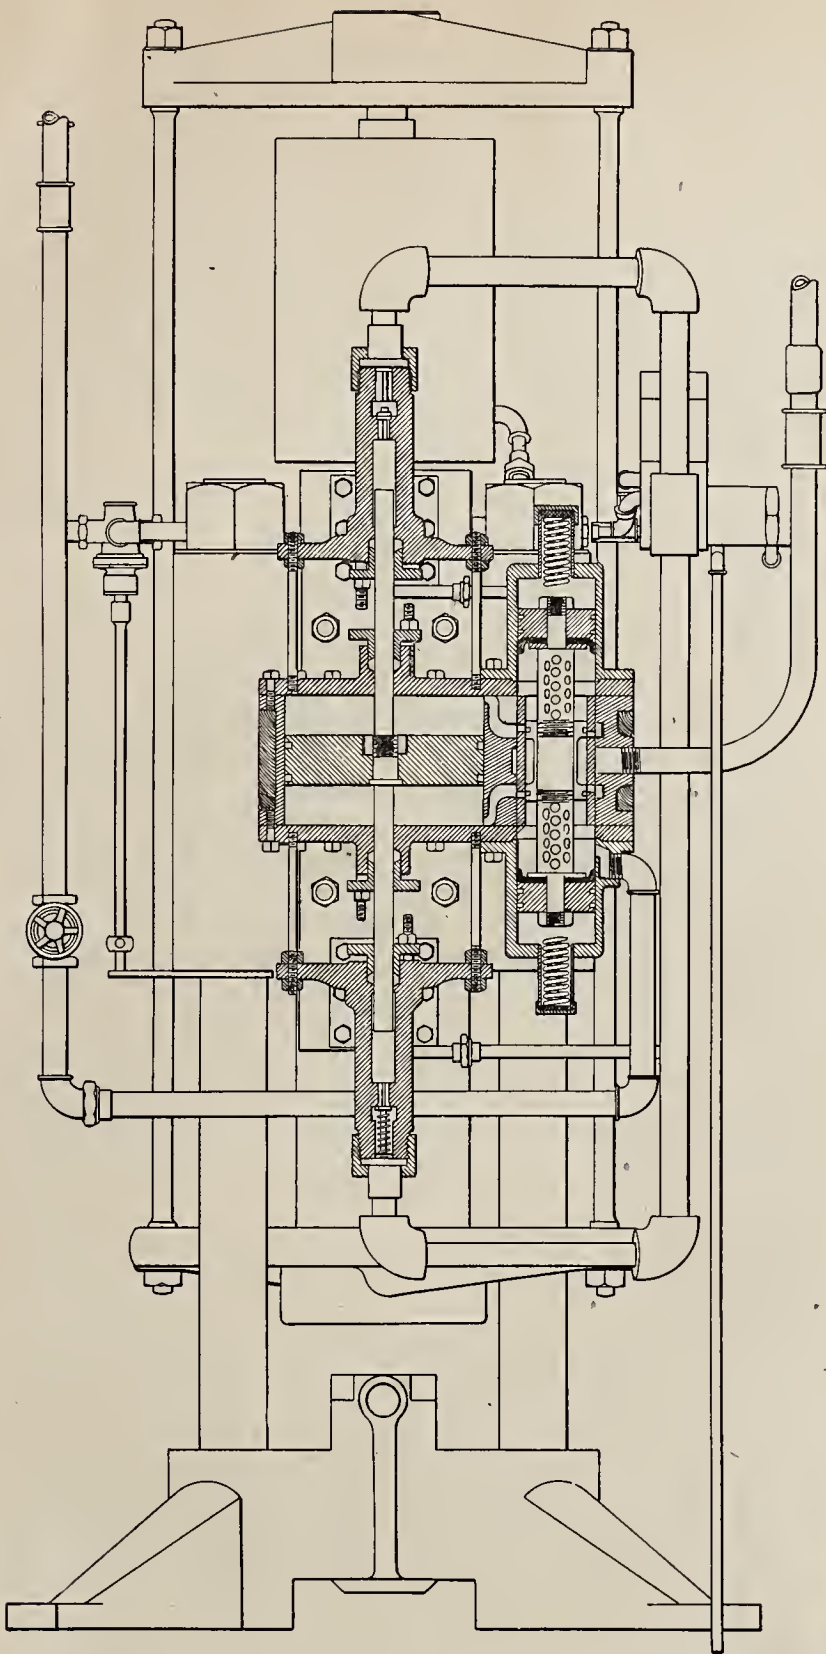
FORGING AND COUPLER POCKET MACHINE.
